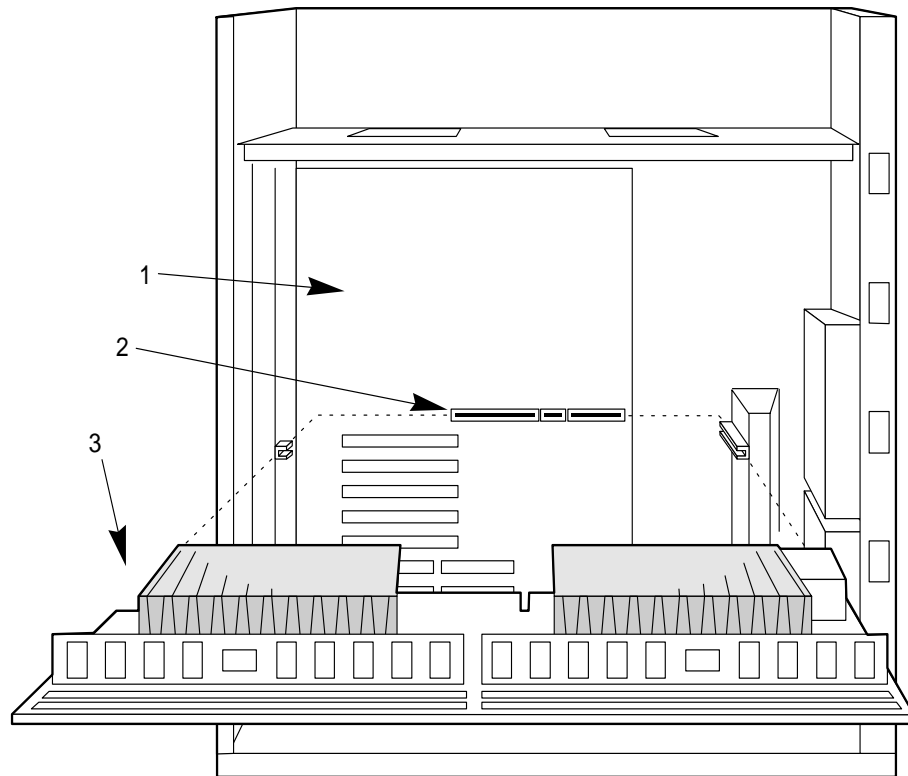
Installing the Dual Pentium Pro Processor/Memory Module
